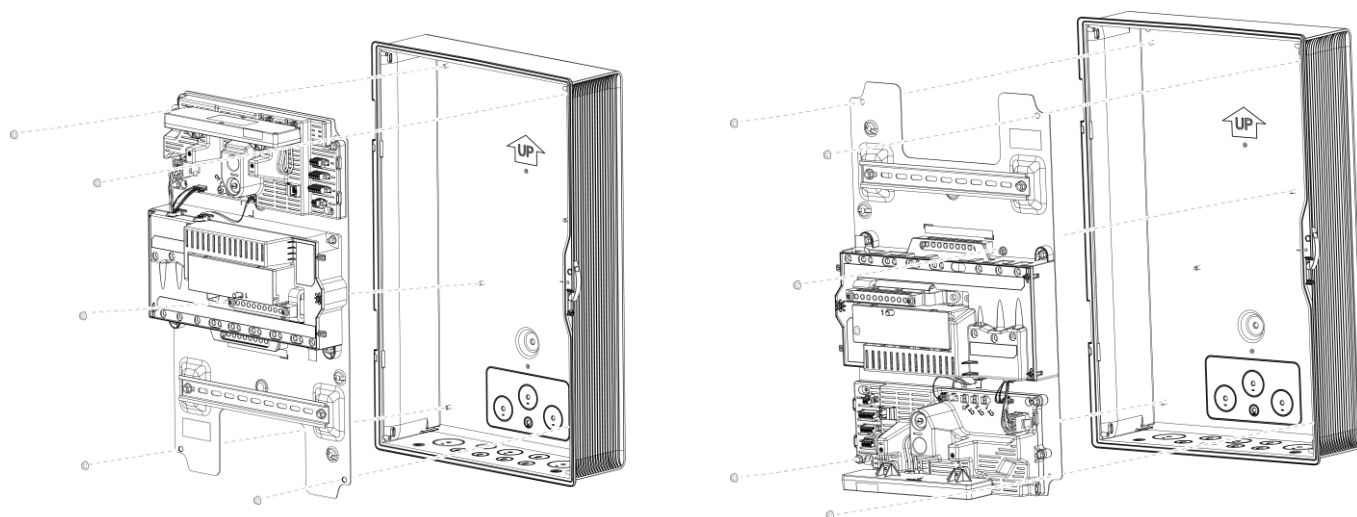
Backplate Orientation for Bottom Cable Entry (left) or Top Cable Entry (right)
